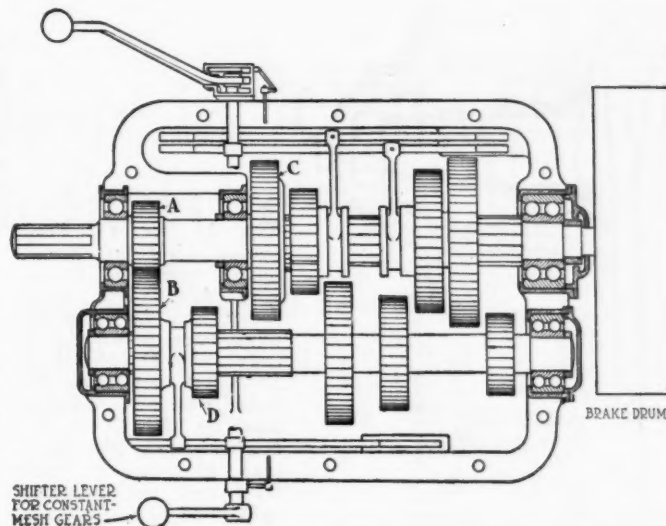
Diagram of new type of gearset employed in N. A. G. bus chassis
